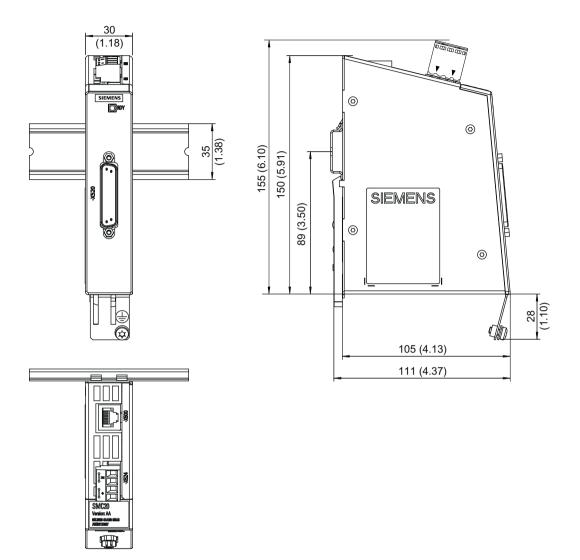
Dimension drawing of the Sensor Module Cabinet SMC20, all data in mm and (inches)
